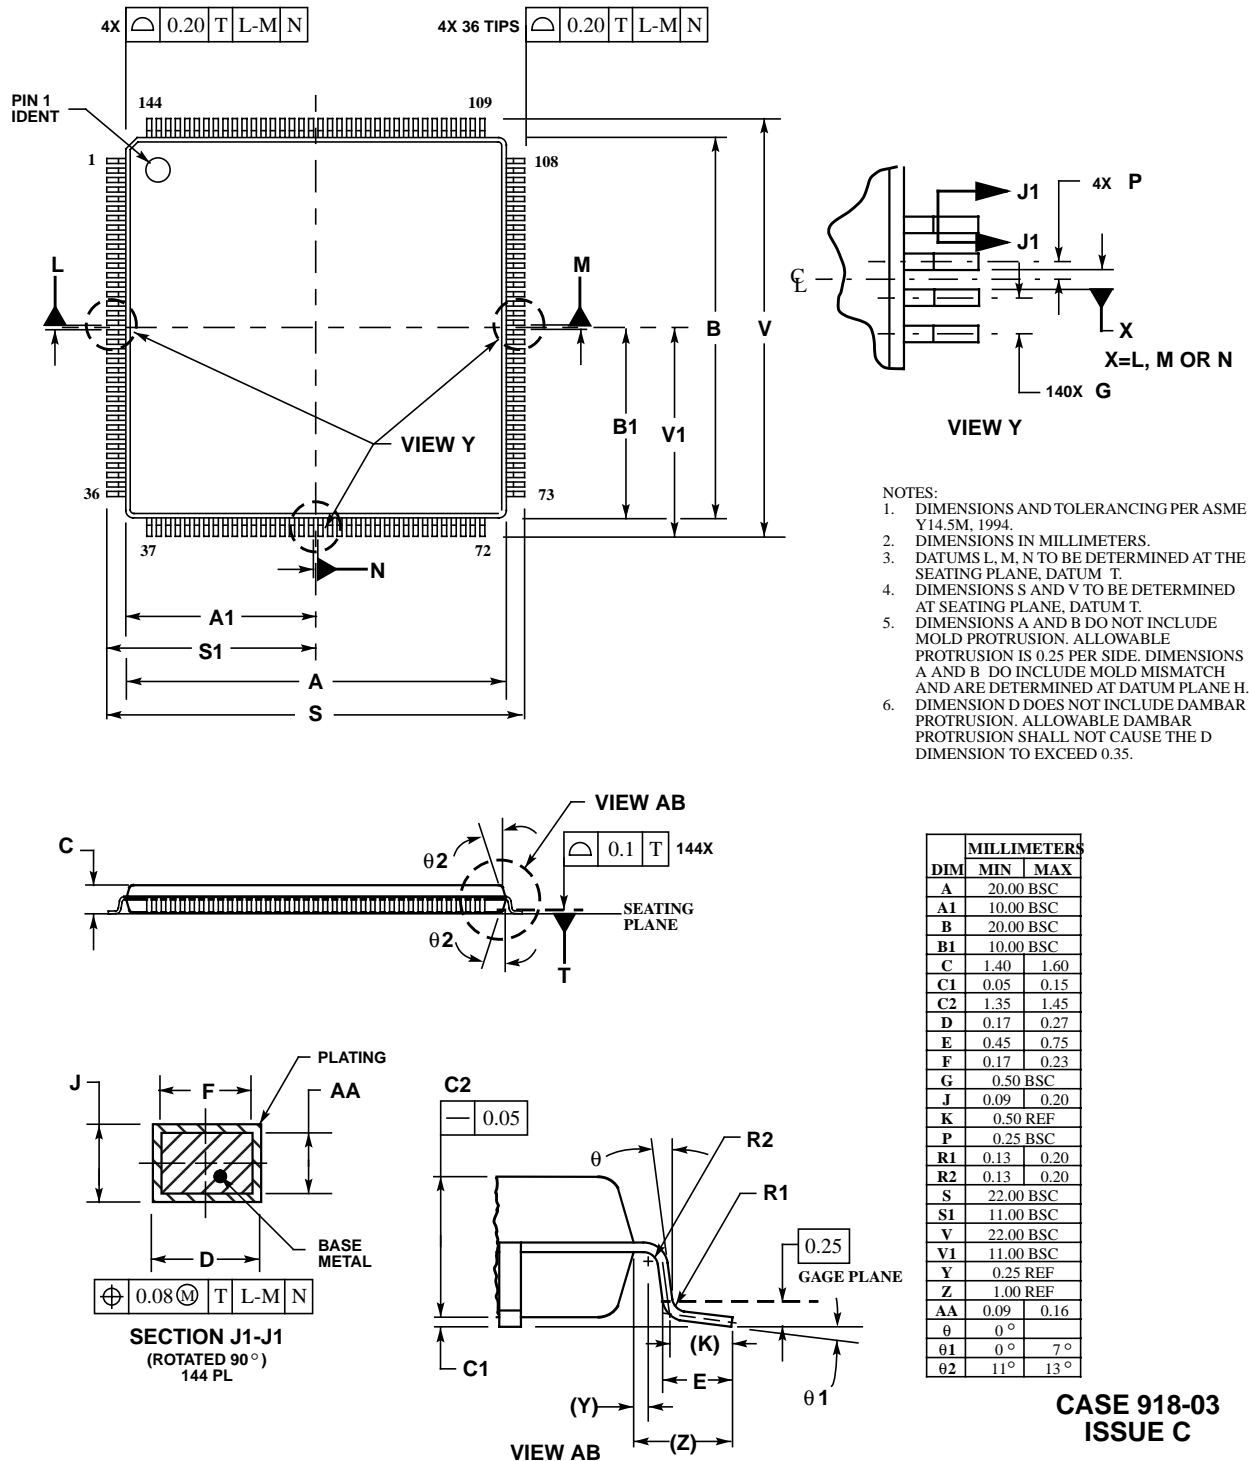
144-pin LQFP mechanical dimensions (case no. 918-03)
